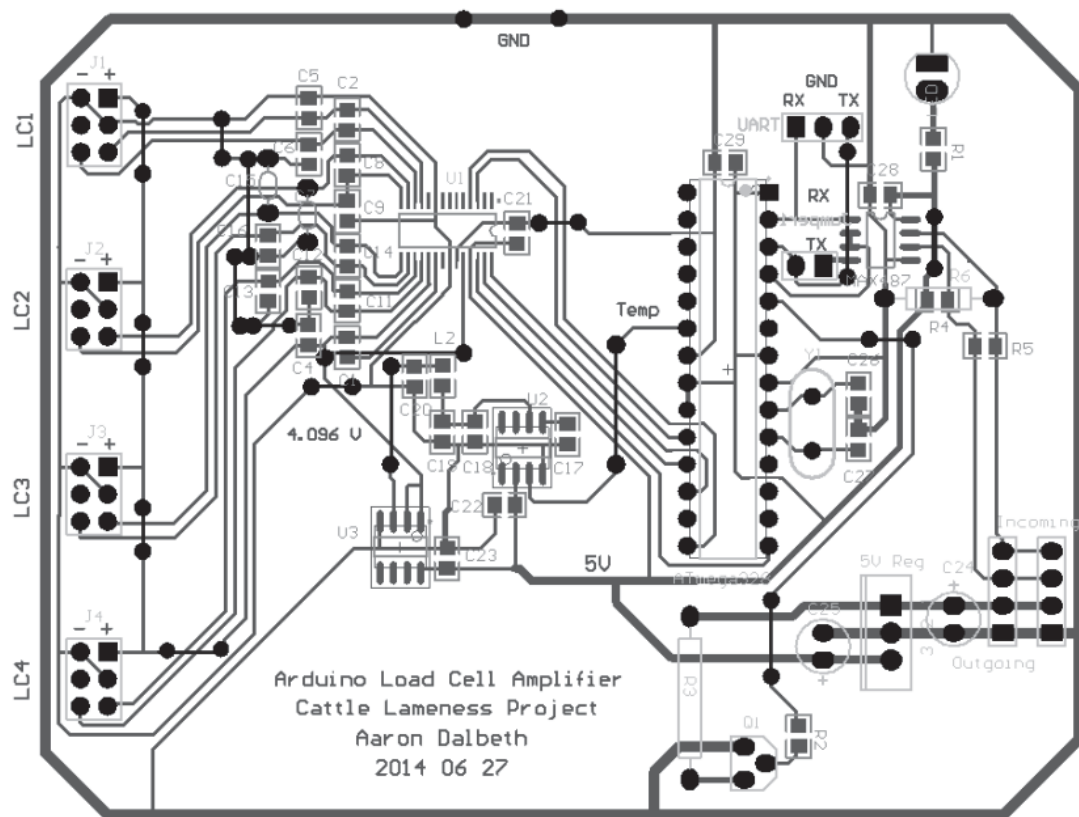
Final Prototype PCB Designed by Aaron Dalbeth
